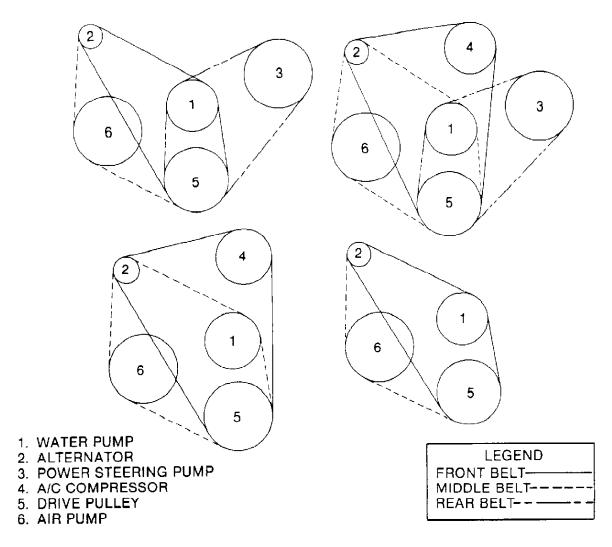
Drive Belt Arrangement: 1983-86 4.2L Wrangler Courtesy of Chrysler Motors
